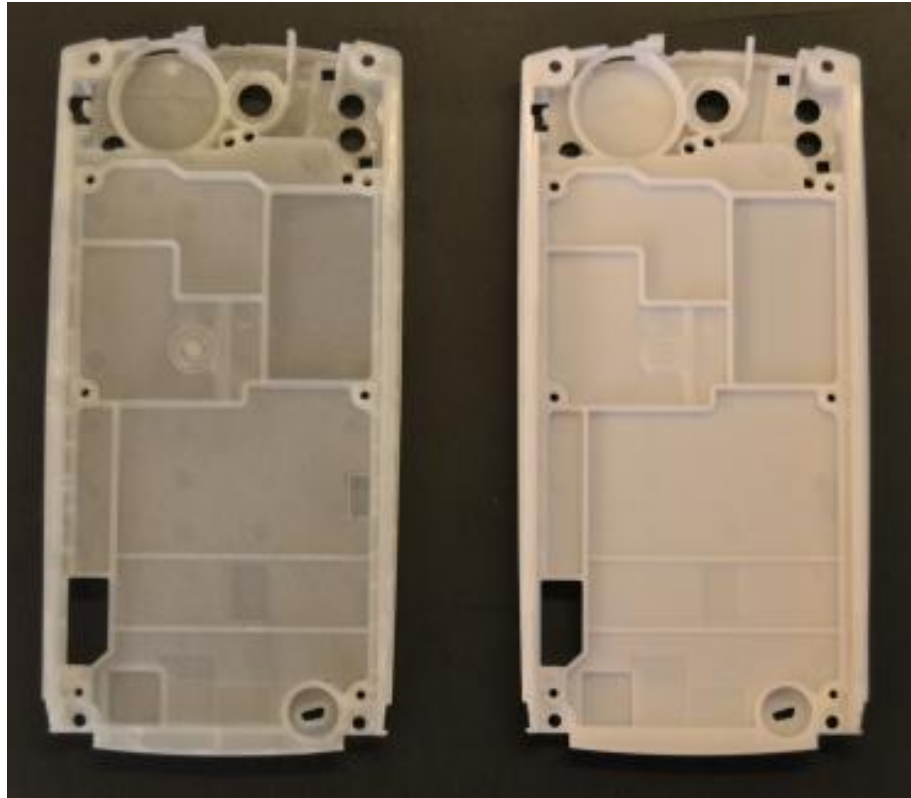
Shape of test pieces molded with Fanuc injection molding machine. On the left is PP GF/30 and on the right is PP Ca/40.
